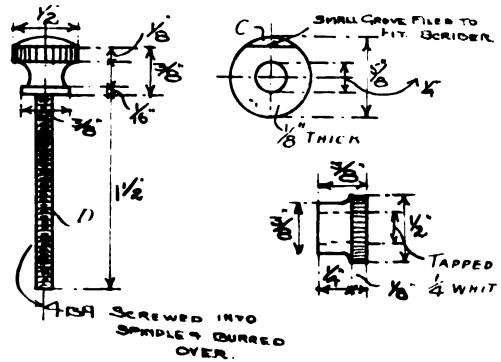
DETAILS OF ADJUSTING SCREW, LOCKNUTS, AND WASHER.
